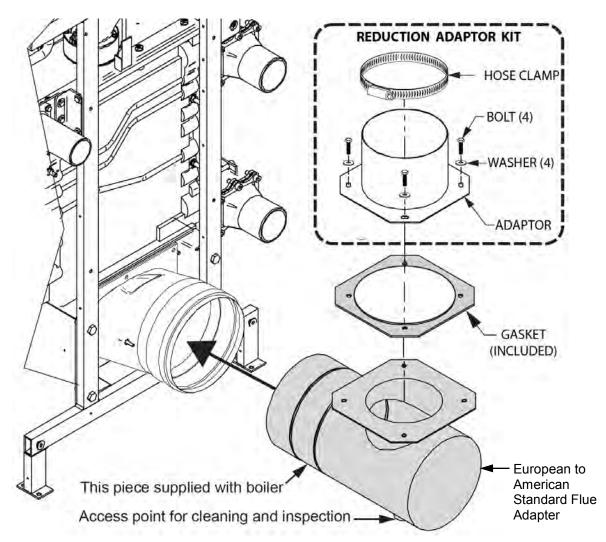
Flue Exhaust Diameter Reduction Adaptor Kit and Parts
